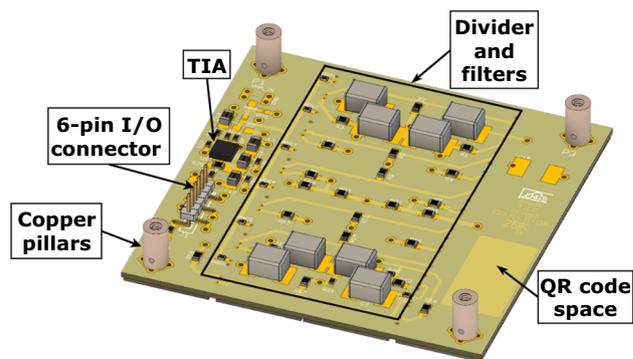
PCB 3D rendering showing the electronic components on the bottom side of the Tile
